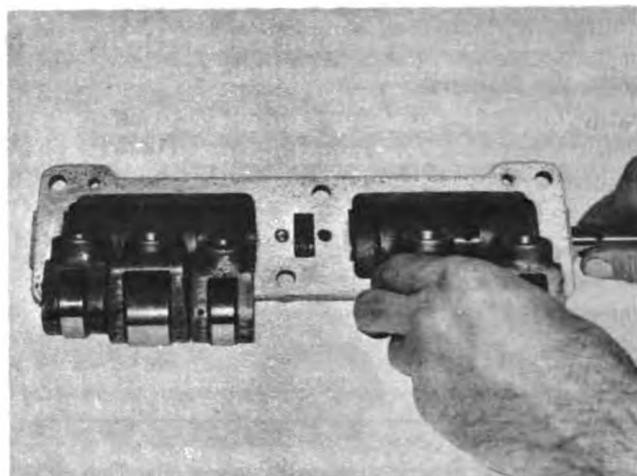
(N10407). Assemble The Levers And Shafts Into The Housing.
